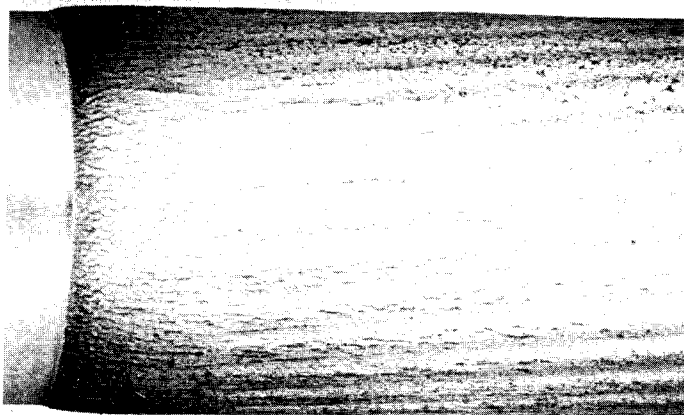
An eroded gun sectioned to show enlargement of the bore and worn rifling
